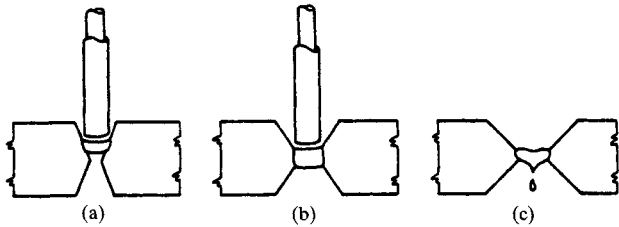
(a) If the gap is too small, the weld will bridge the gap, leaving slag at the root; (b) a proper joint preparation; (c) a root opening that is too large will result in burnthrough. (*The Lincoln Electric Company.*)
